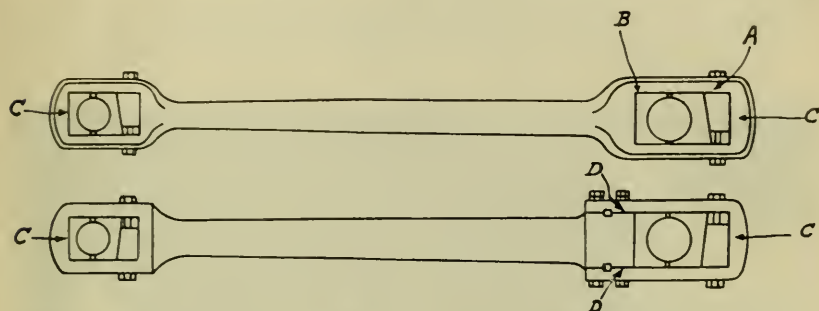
(above)—Solid-end type of connecting rod. Figure 3 (below)—Open-end type of connecting rod for center crank engines.
